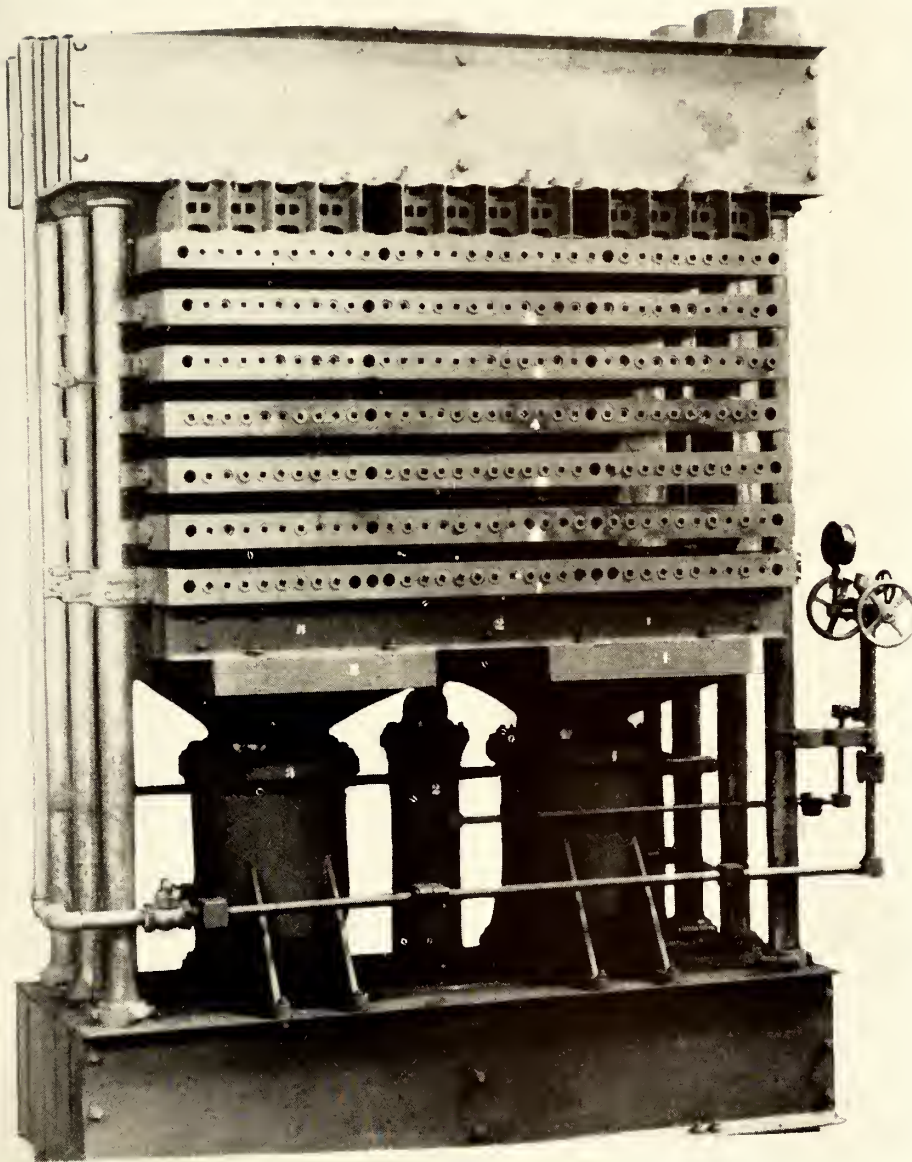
Hydraulic, 6-opening, hot-plate press used in the manufacture of flat plywood.
